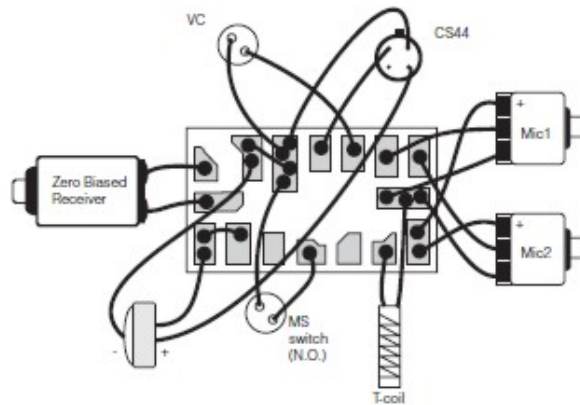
Typical Hearing Instrument Assembly Diagram
